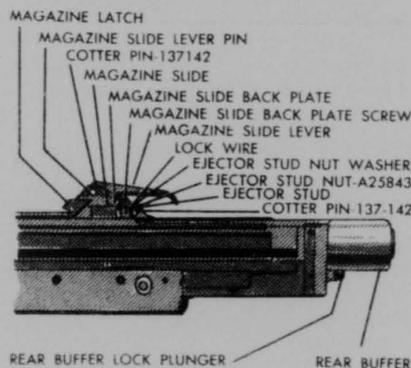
Removal of Rear Buffer and Magazine Slide.
